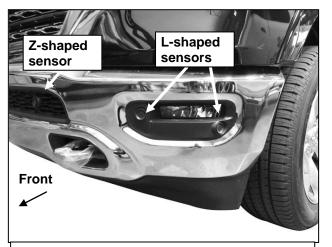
Insert Plastic Sensor Cover into sensor mount on the front of the bumper
